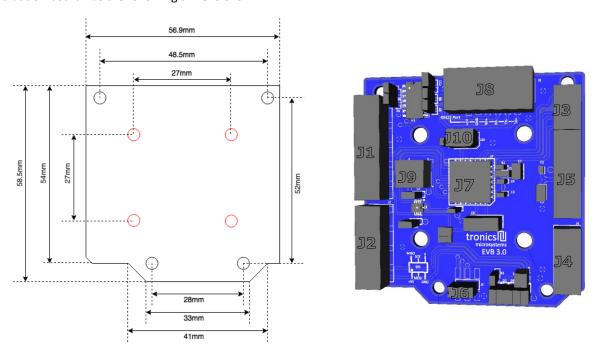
GYPRO®AXO®-EVB3 board (unpopulated) dimensions in millimeters with 3D top view
